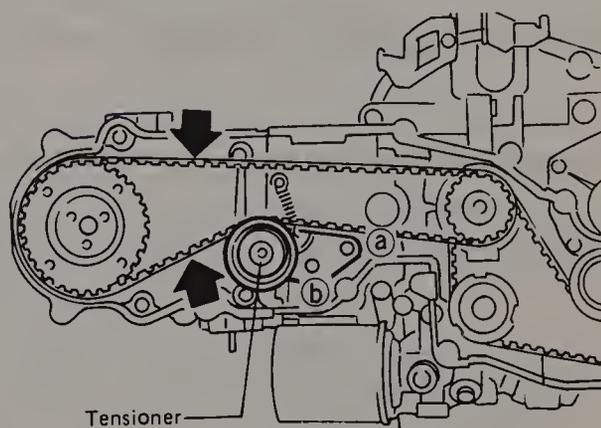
Install the timing belt over the crankshaft and camshaft sprockets and check to be sure the tensioner has removed the slack from the belt by squeezing it at the points shown (arrows) (Sec 4)
